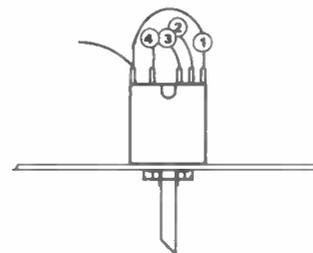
Wire connections to the backs of the band switch as viewed from the component side of the PCB
